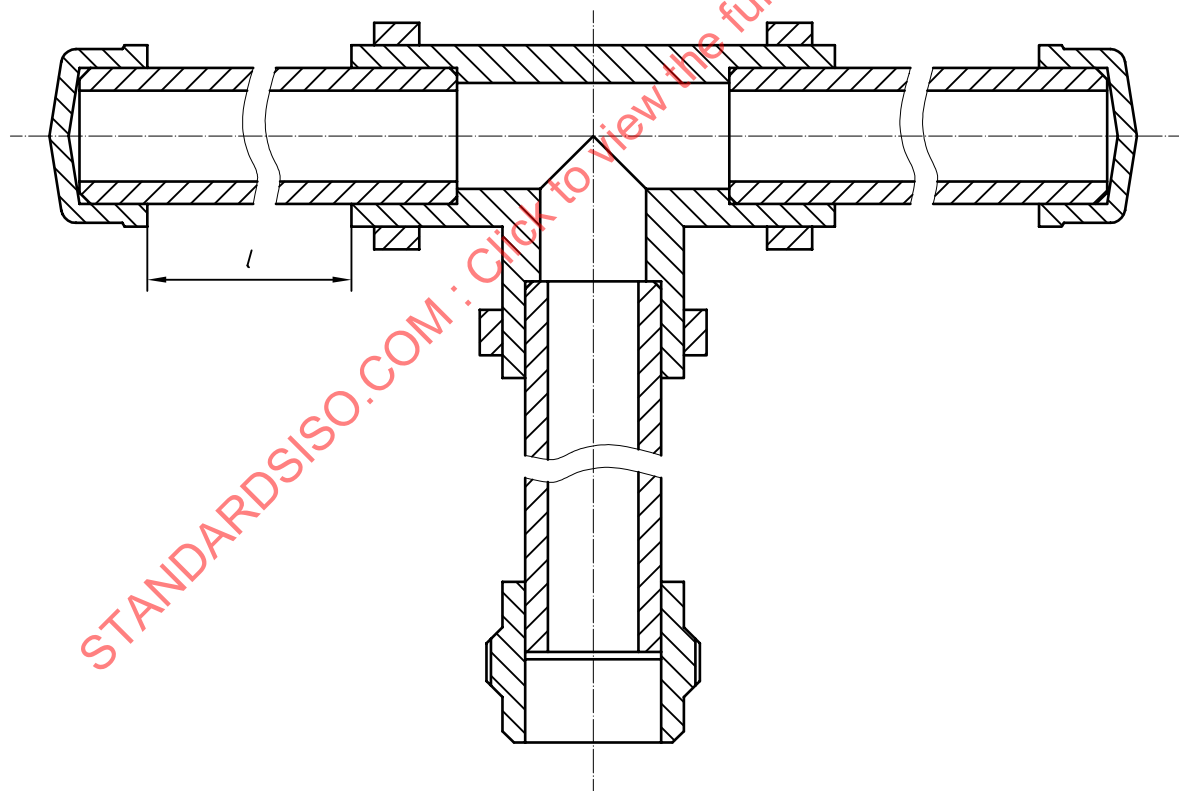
Example of a pressure-tight test piece assembly with solvent adhesive joints and with hydrostatic end thrust
